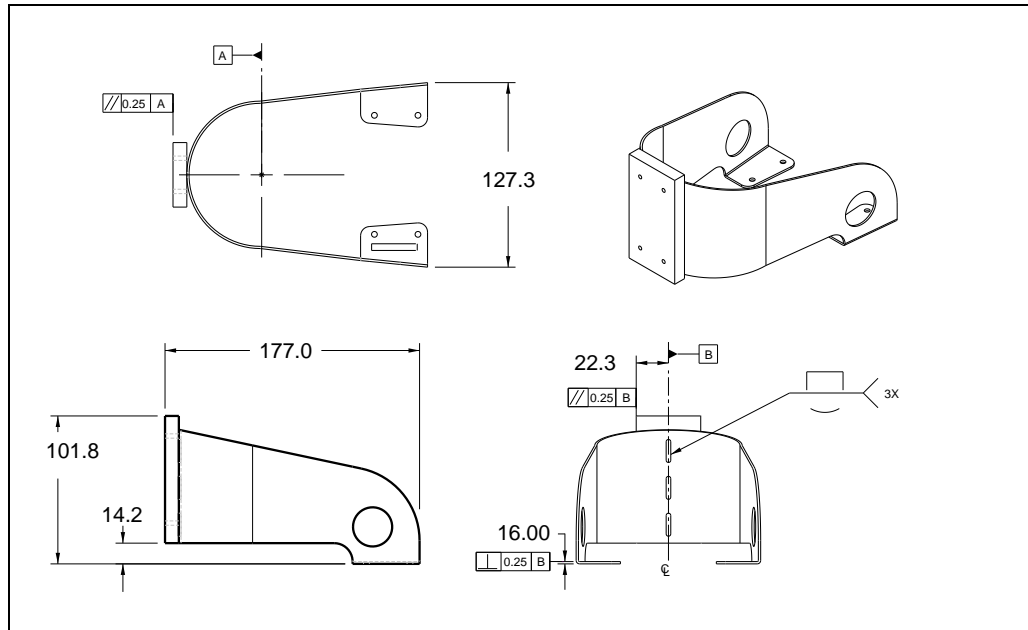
Camera Bracket Drawing, 1 of 2 (Units in mm)
